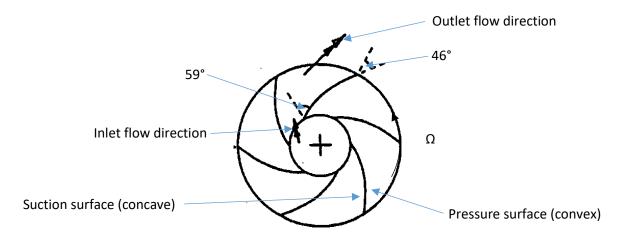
Impeller dimensions, high pressure and low pressure surfaces
